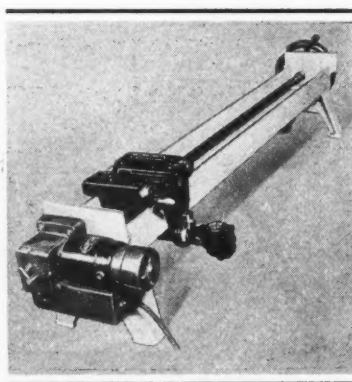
Oxweld Machine for Trimming and Beveling Plates
